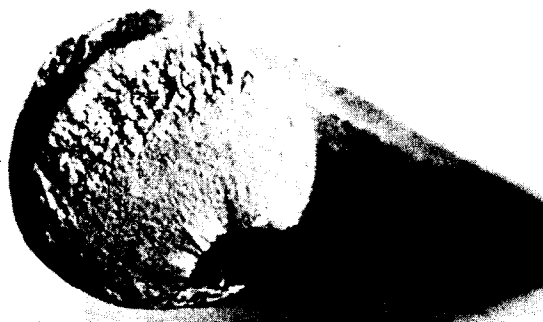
CORROSION-FATIGUE CRACKING
